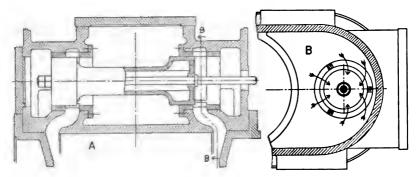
Cylinder with Plain Piston-valve. Scale 1 to 12.
